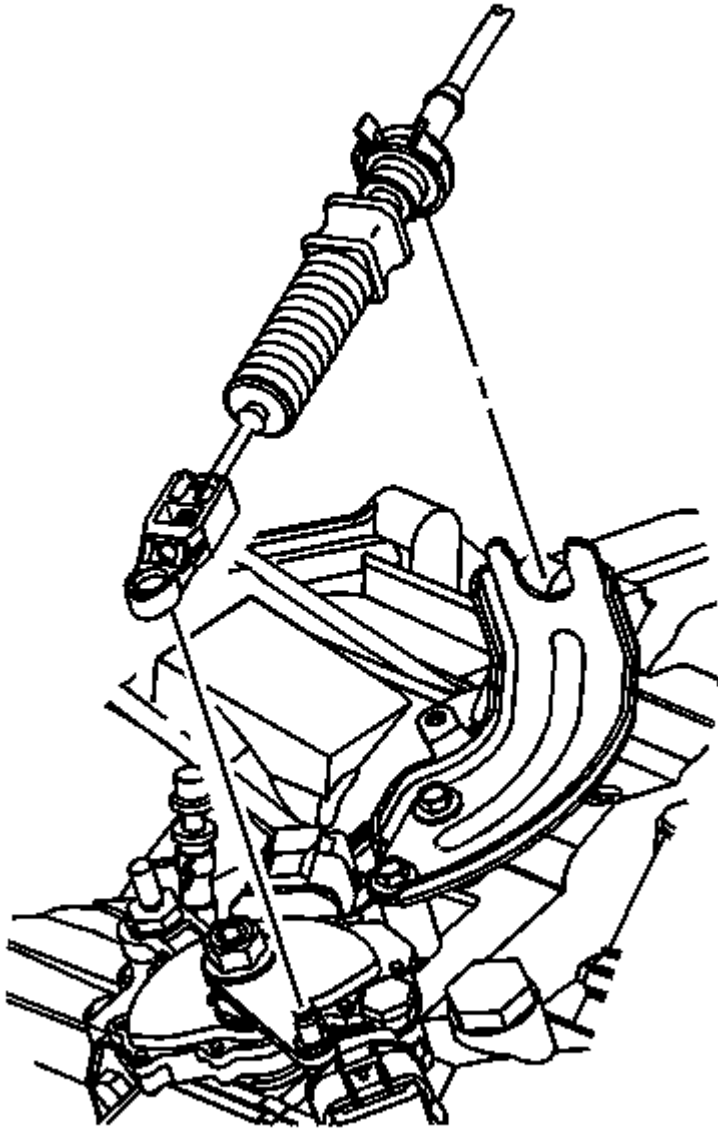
View Of Automatic Transmission Range Selector Lever Cable Bracket
